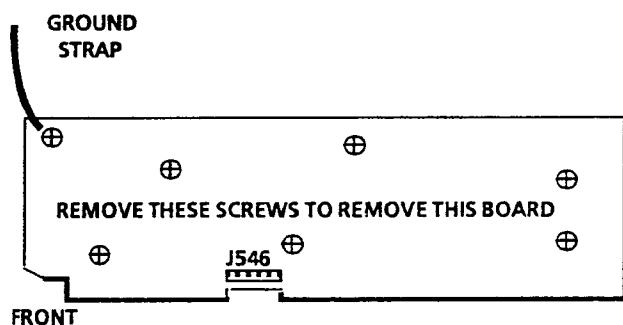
Screws holding the Power Supply board (A1) in place.
